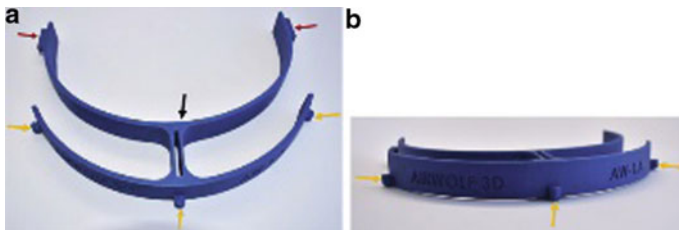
Face shield: three-dimensionally printed frame. *Courtesy* Amin et al. (2020)
